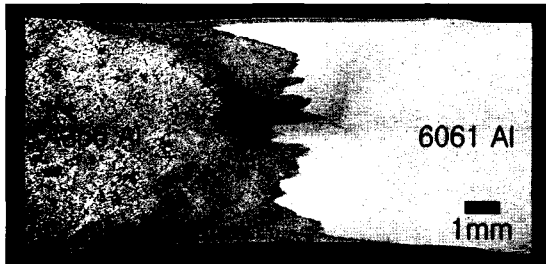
Microstructure of a FSWed A356/6061 aluminum alloy plate
